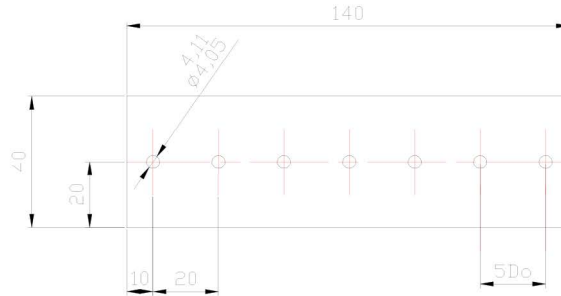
Specimen geometry used in rivet hole expansion measurements
